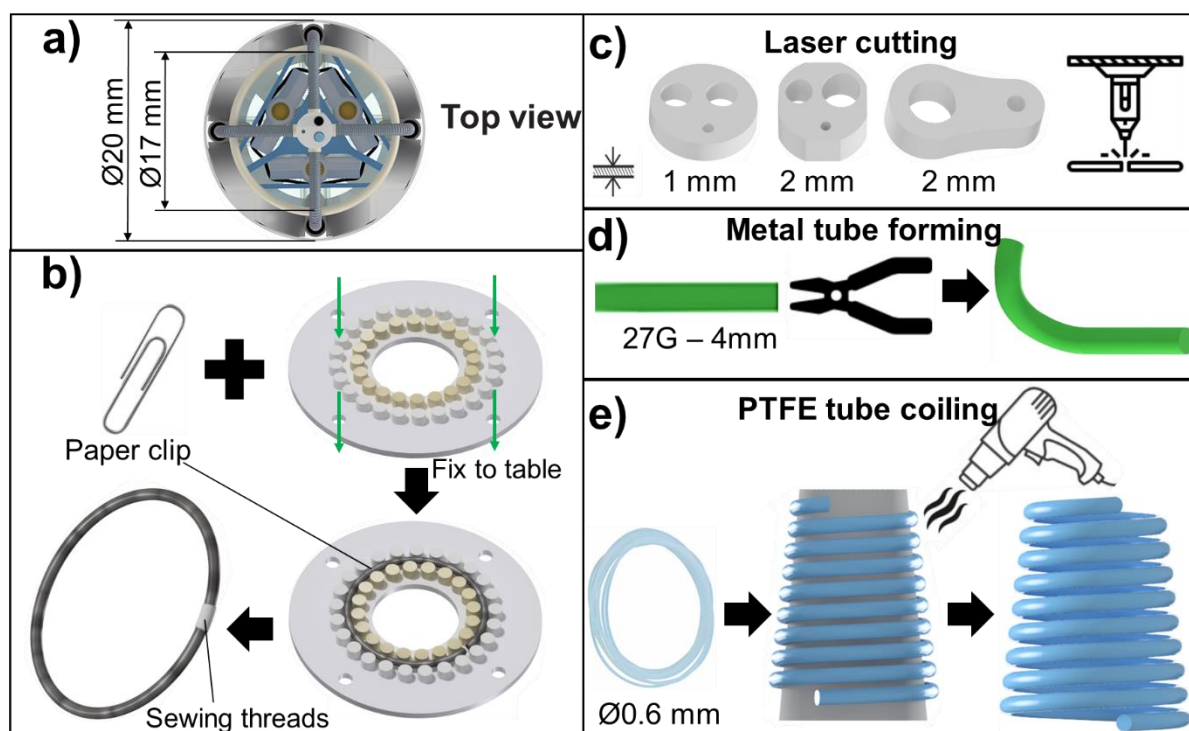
The fabrication process of the 3D-printing head. (a) Top view of the printing head. (b) A fabrication process of the stainless steel ring. (c-e) A fabrication process for three acrylic elements, curved metal tubes, and helical PTFE tubes, respectively.
